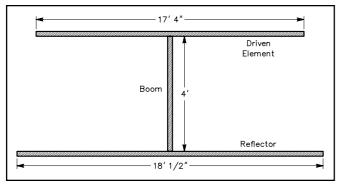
Dimensions and mounting configurations for the boom, driven element and reflector element.
